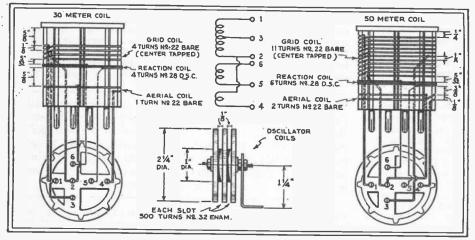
Details of coils and winding data, also dimensions of wooden form for quenching oscillator coils.
